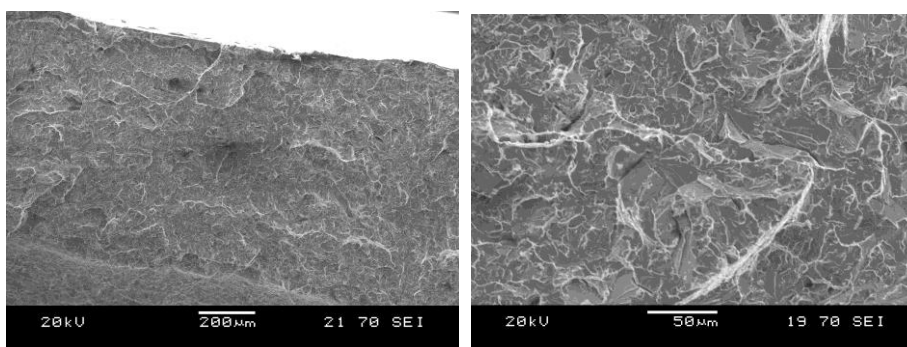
Split fracture surface (from Figure 5.6 b) showing transgranular cleavage.
